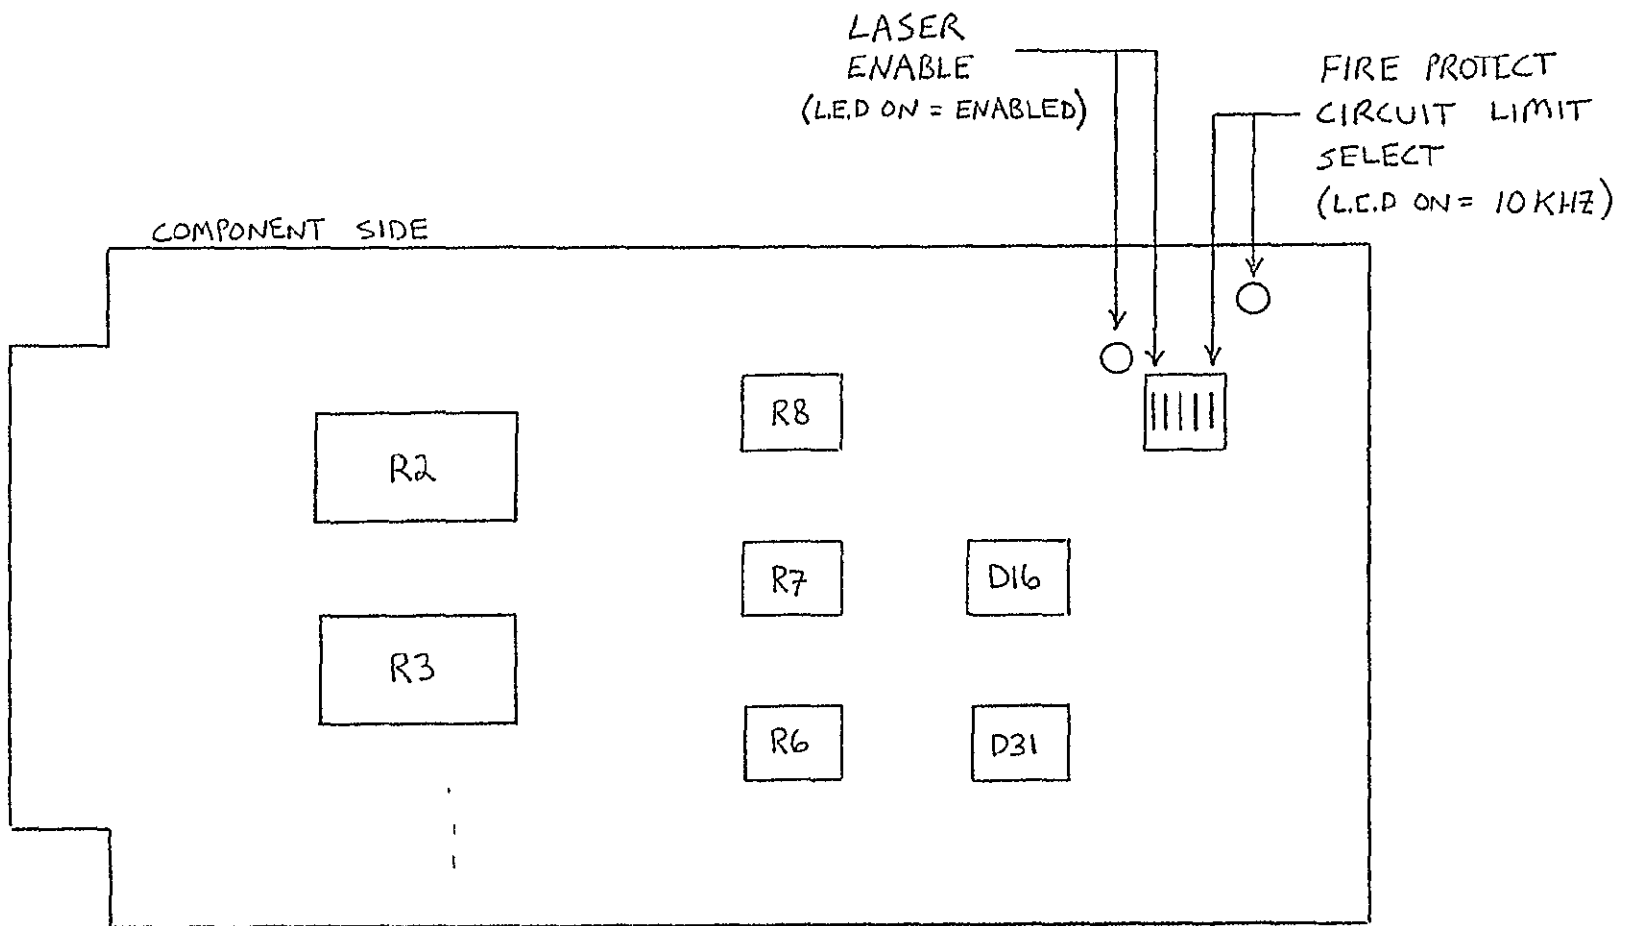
RATE BUFFER BOARD CHIP LAYOUT
